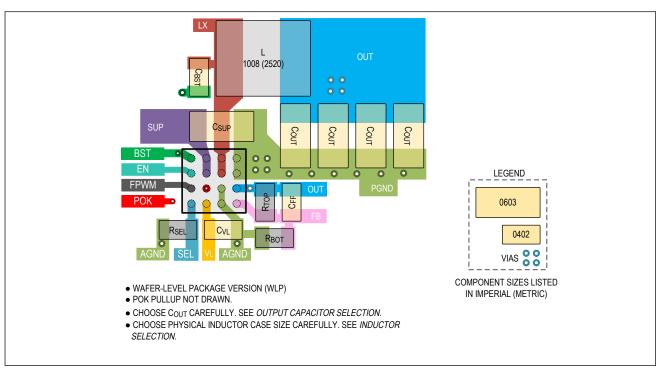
PCB Top-Metal and Component Layout Example (WLP Version)
